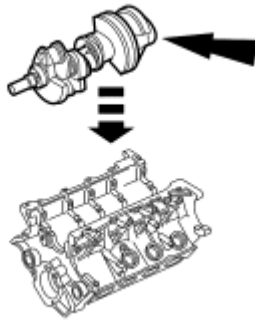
Lubricating Upper Crankshaft Main Bearings With Clean Engine Oil
